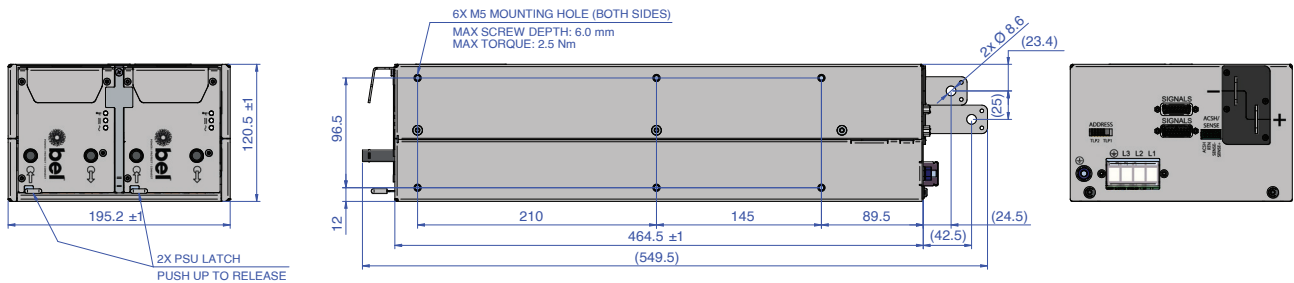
TLS-2-48 Shelf (mechanical drawing)
